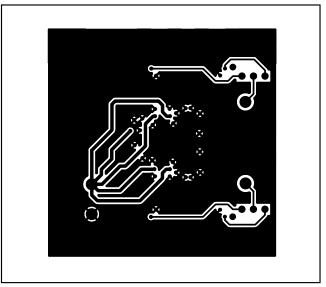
MAX2023 EV Kit PCB Layout—Inner Layer 3 (Routes)
